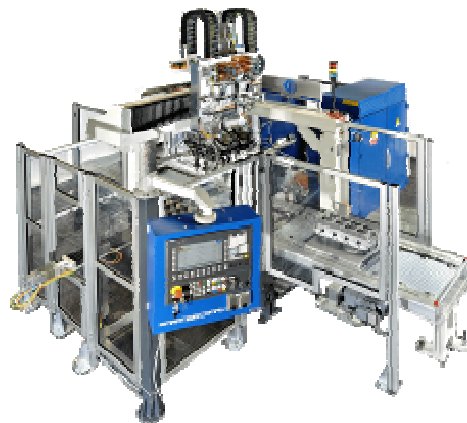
SmartBoxComau – serial production flow standardized assembly module
